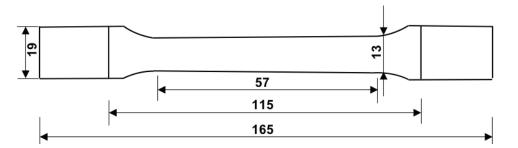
Tensile test specimen dimensions (mm), sample thickness: 6.35 mm.
